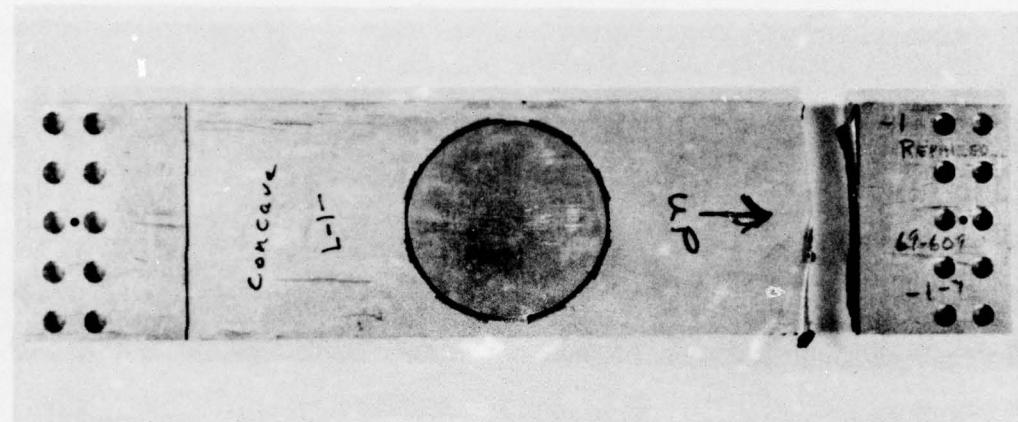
Typical Fatigue Failure—Repaired Aluminum Specimen—AF127-3 Adhesive
